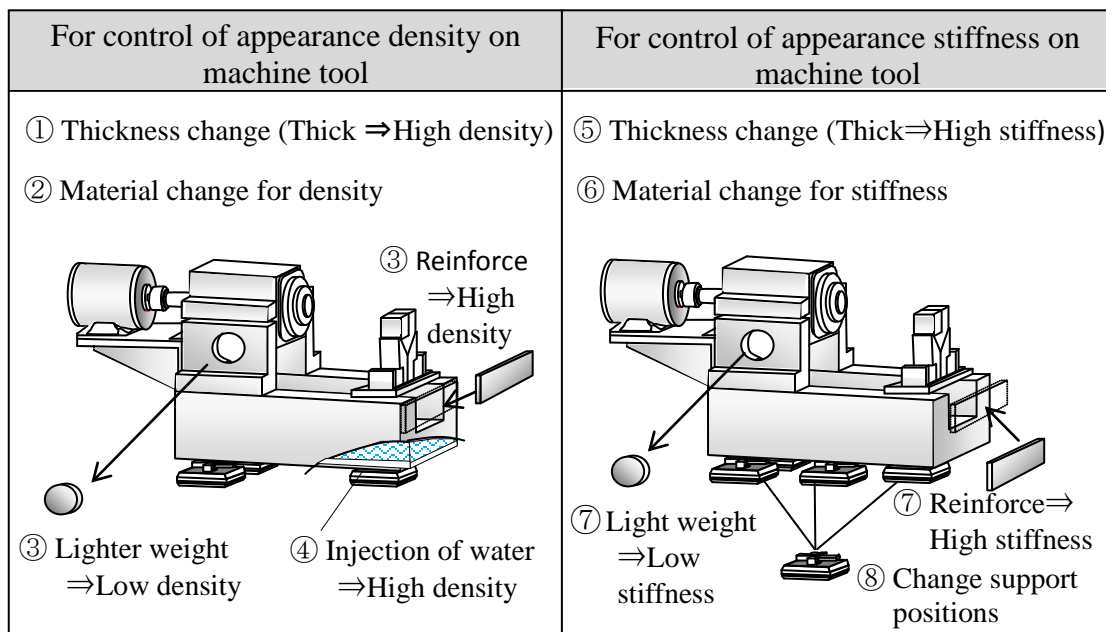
Schematic view of several techniques for controls of appearance density and stiffness in a machine tool
